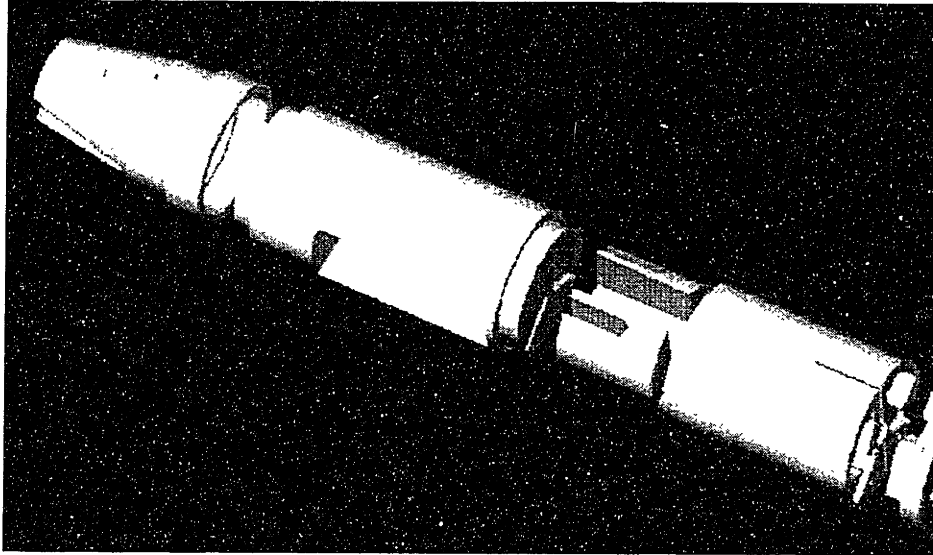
EXPLODED VIEW OF THE THREE FLYER MODULES
